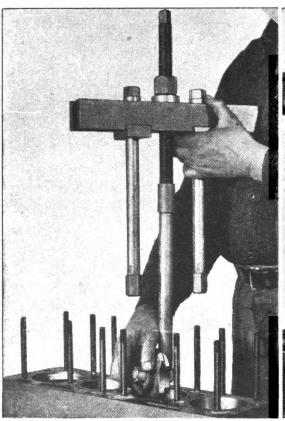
Inserting Puller into Cylinder Barrel Preparatory to Pulling. This is a Combination of Owatonna Tool Co. Tools—other Standard Tools will do as well.
